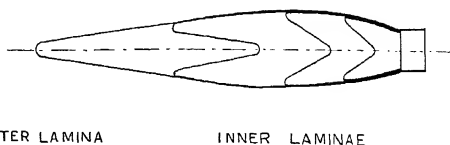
STEEL AIRSCREW BLADE LAMINÆ.
